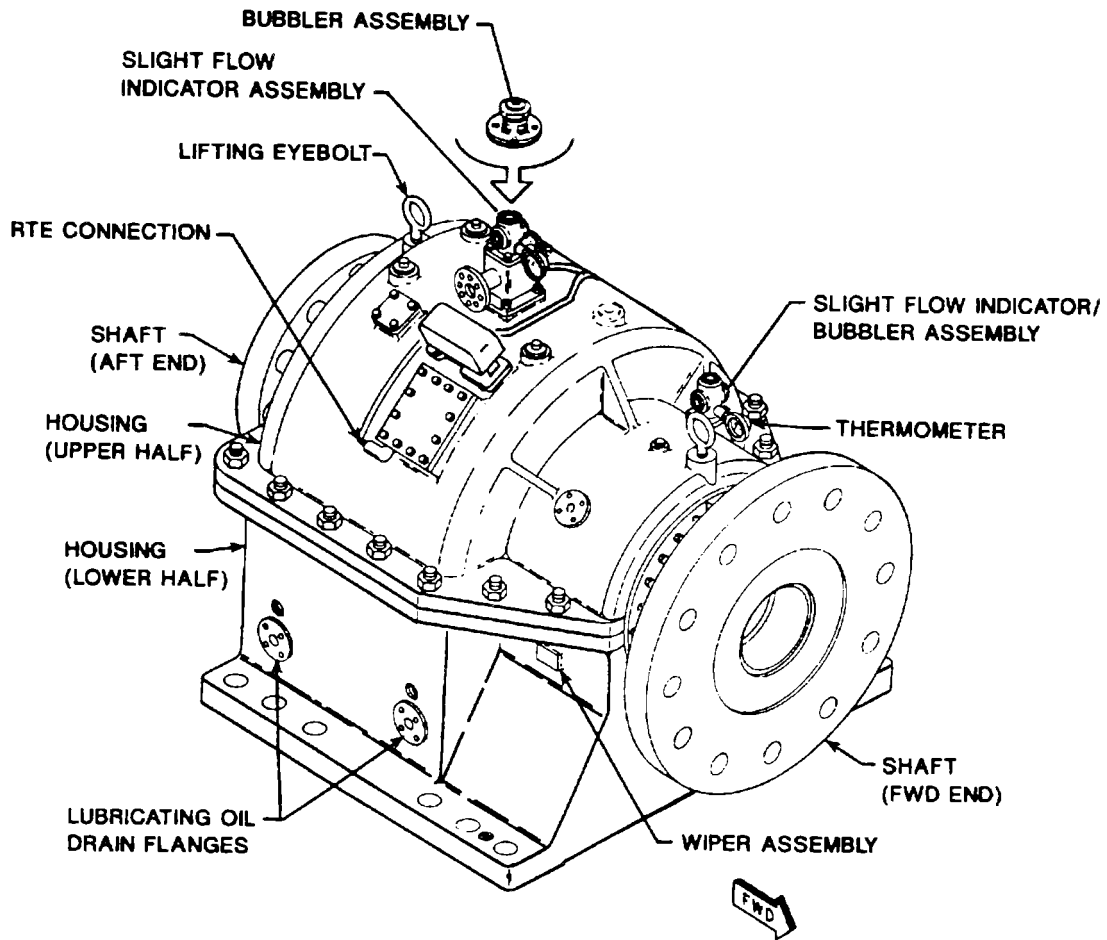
Typical Remote Mount Thrust Bearing Housing
